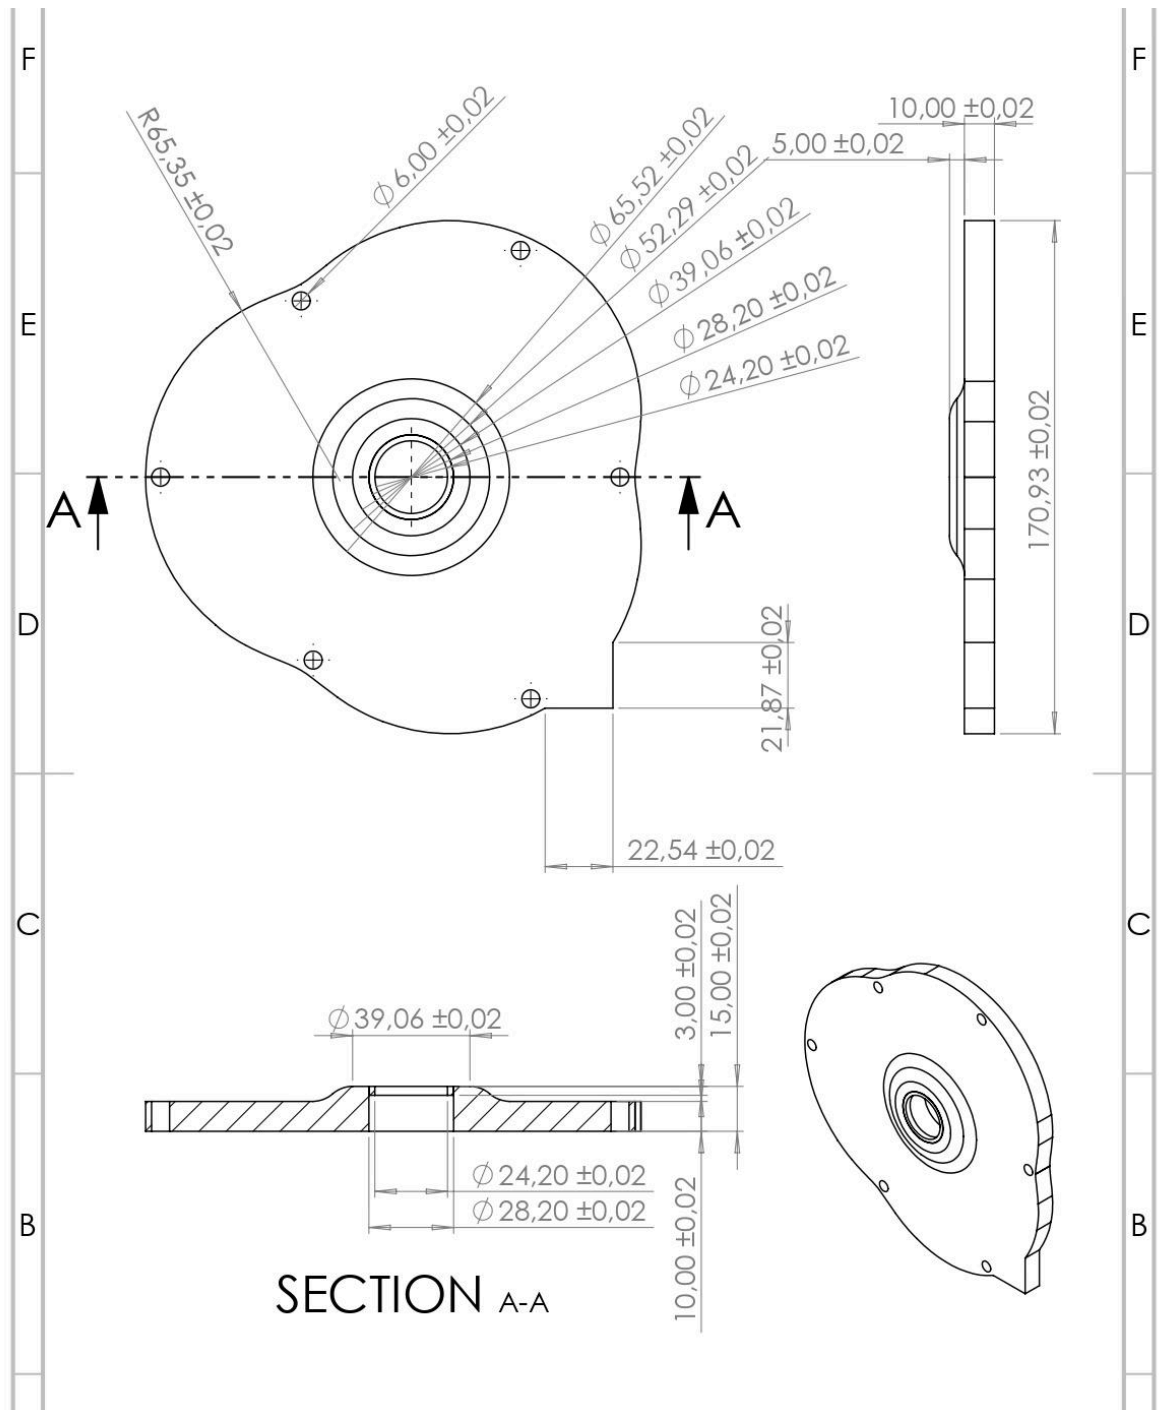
3D printed LiquidPiston Engine housing cap drawing
